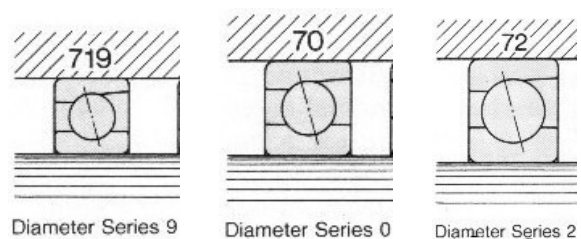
Bearings with greater number of rolling elements and smaller dimensions.
